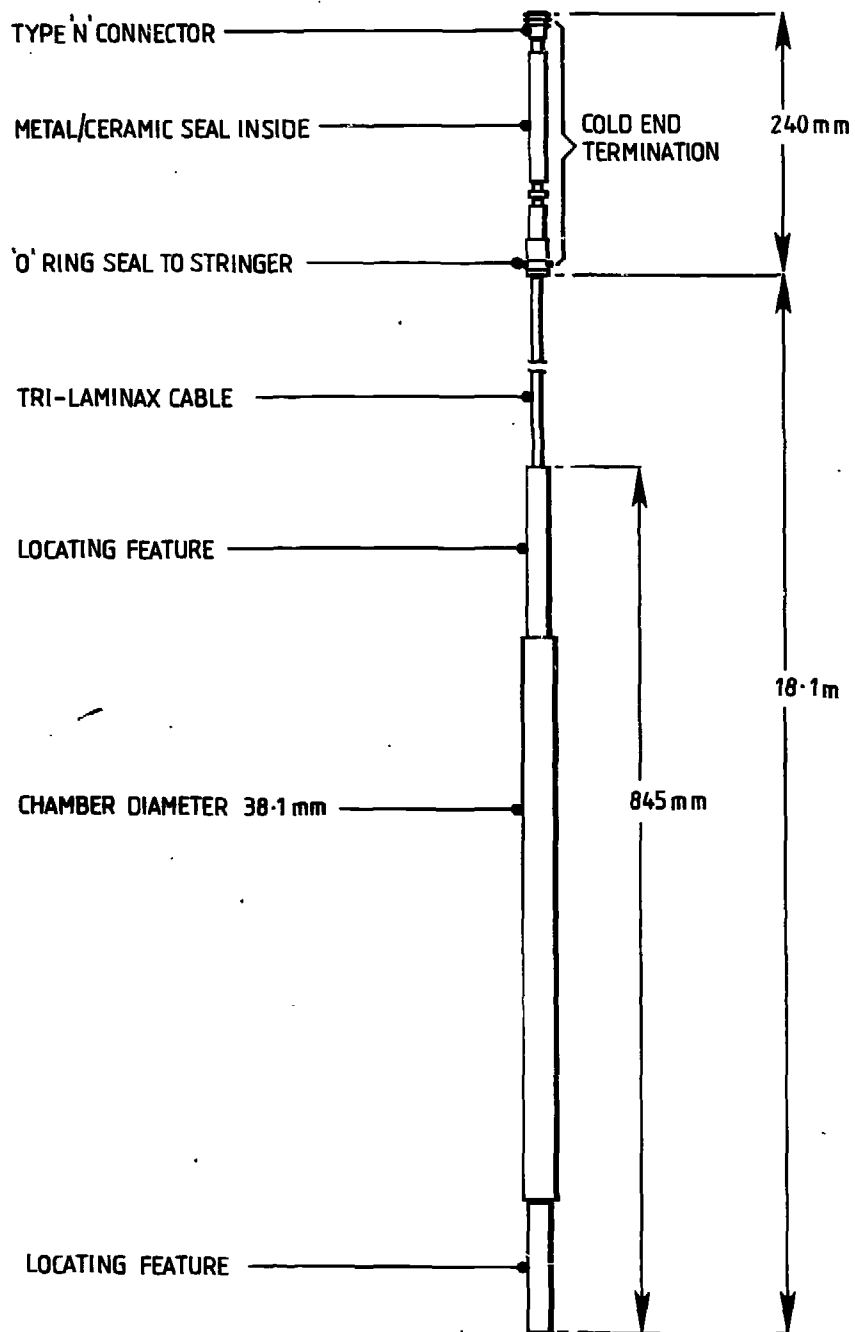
OUTLINE SKETCH OF CHAMBER AND COLD END TERMINATION ASSEMBLY
